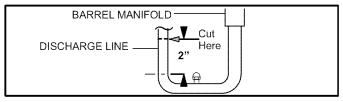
Replacement Coil Discharge Line - XC14-030 thru -060, XC13-060, AC13-048 & -060
